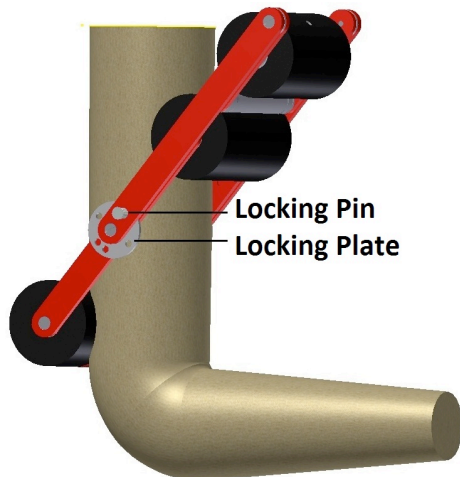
LSMD Arm v2 locked folded and placed on the arm for flexion.
